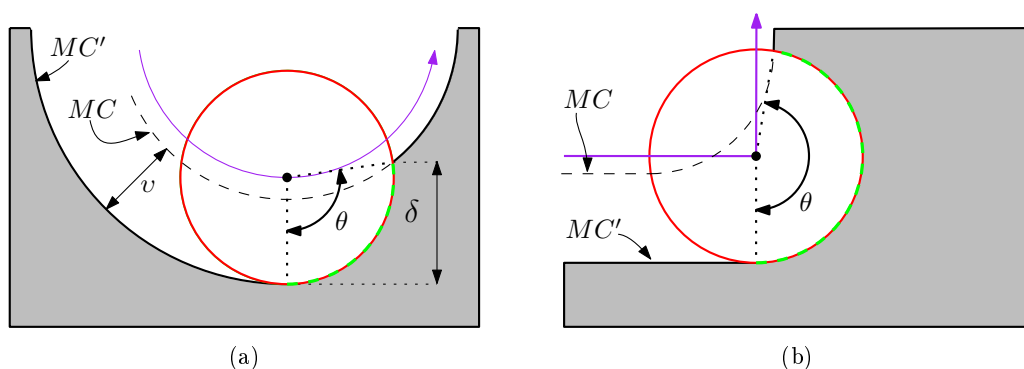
Cutting width v and engagement angle θ for the motion of a tool (depicted by a red disk) along a tool path (shown in purple). The old machining contour is denoted by MC and the new contour is denoted by MC' . The unmachined material is shaded grey.
